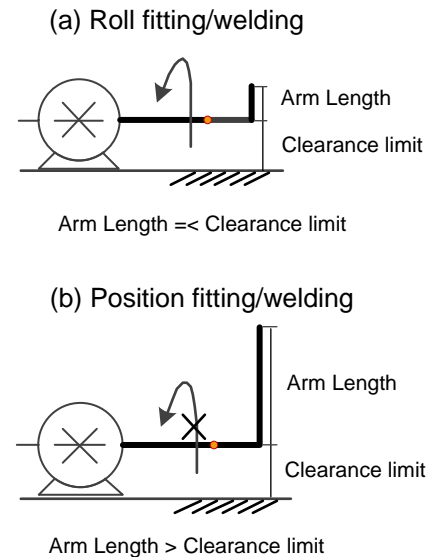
Roll welding vs. position welding (Di and Mohamed 2012)³
